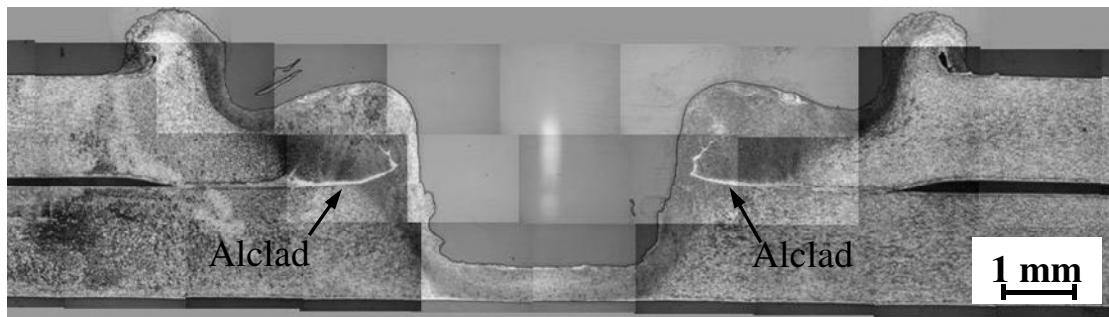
The cross section of an Alclad 2024-T3 friction stir spot weld showing the intractable Alclad layer after FSSW.
